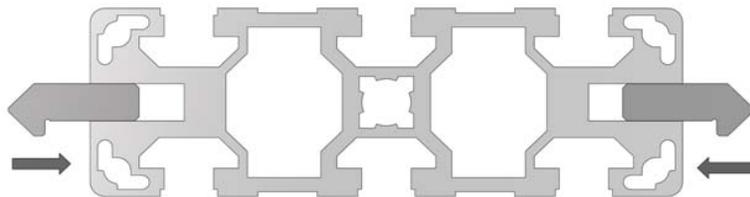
Steel v-rails inserted into extruded pockets in an aluminum structure.
